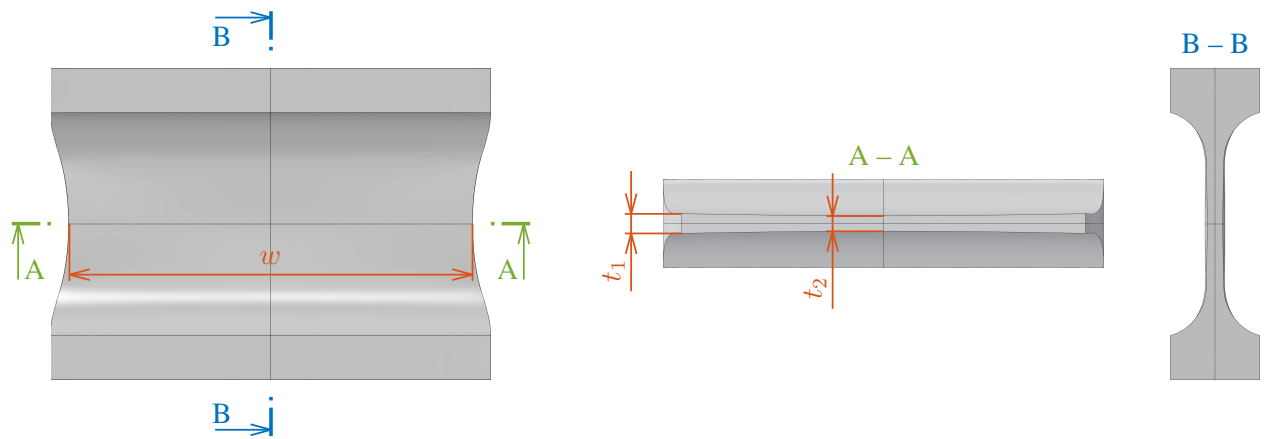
Necking dimensions and cuts for the tensile flat specimen at the instant of failure.
